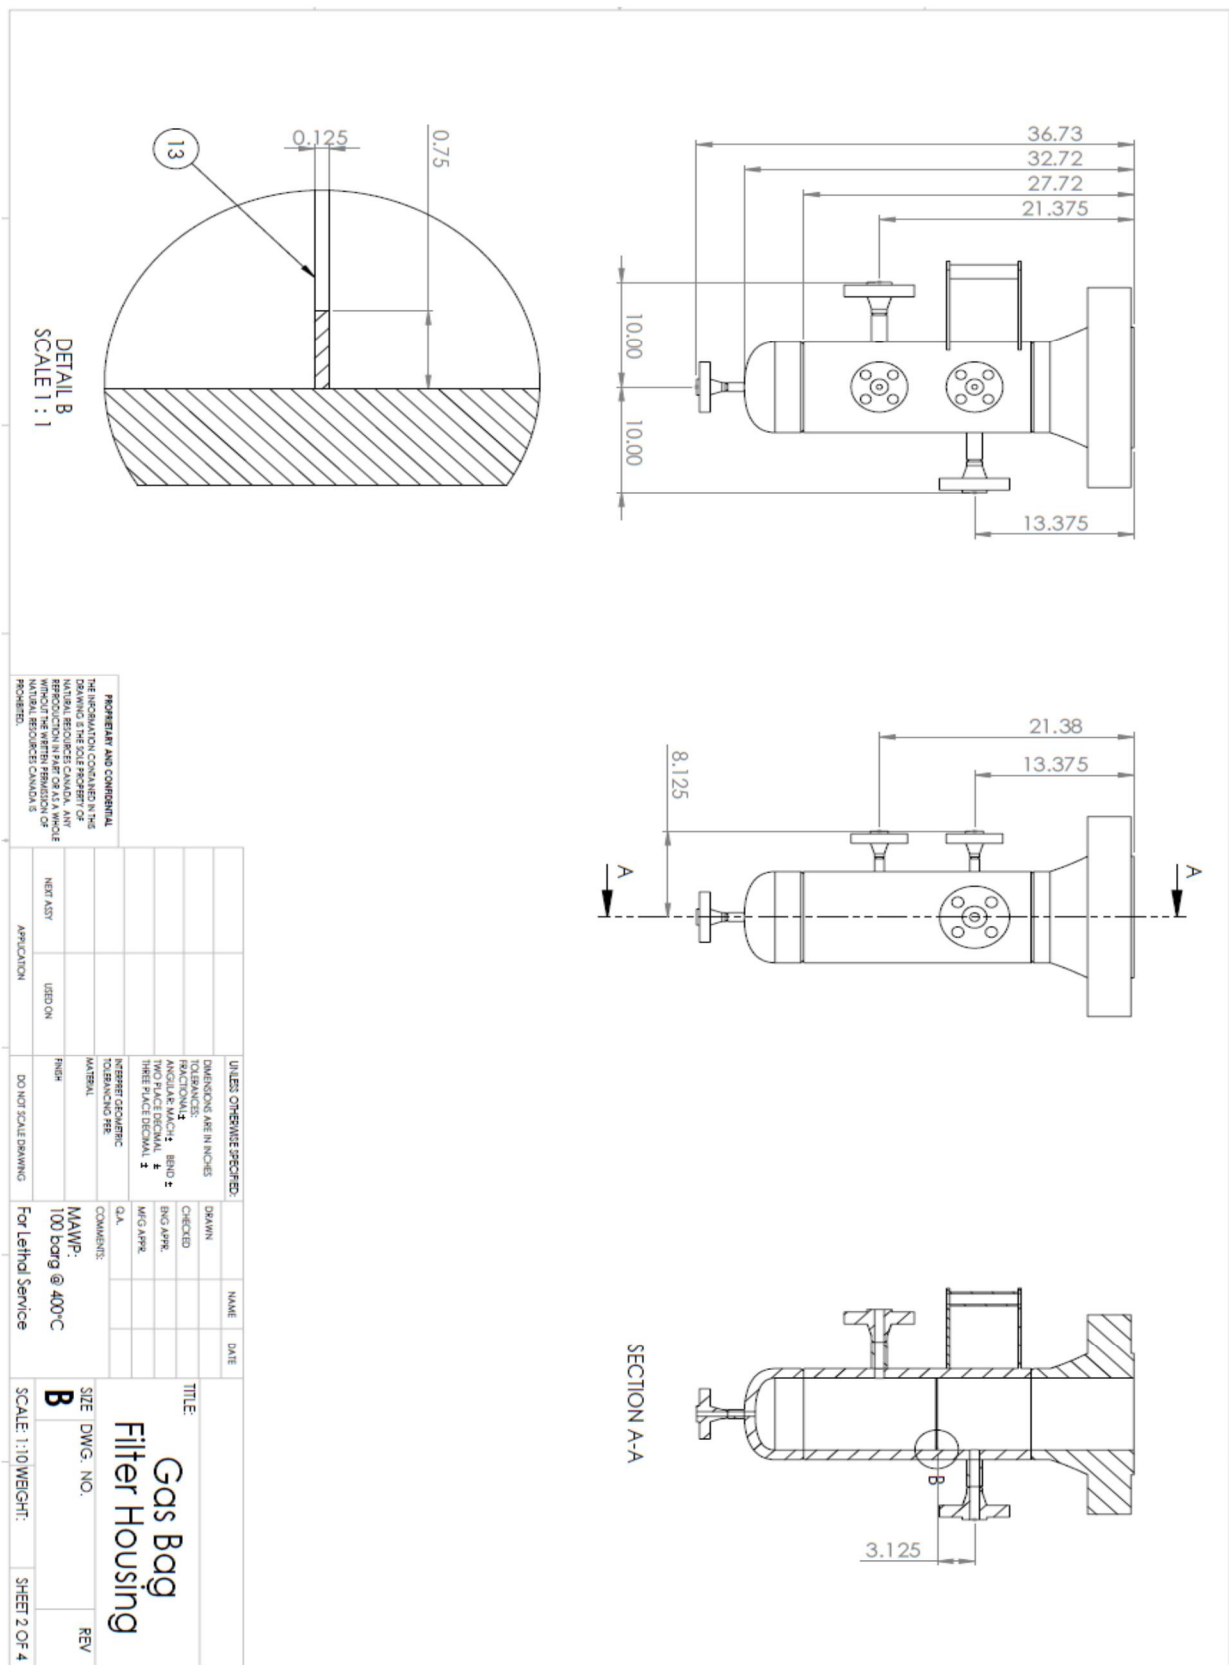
FILTER HOUSING ASSEMBLY
